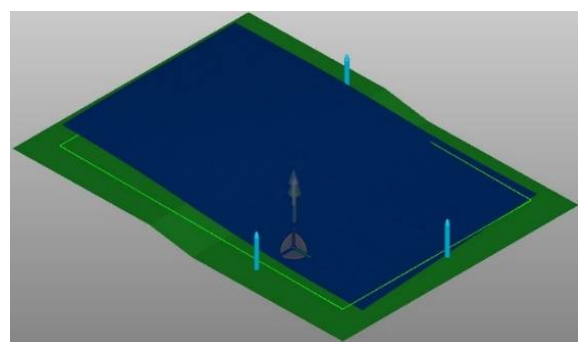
Improper positioning with 4 gauges and incorrect placement of the blank
